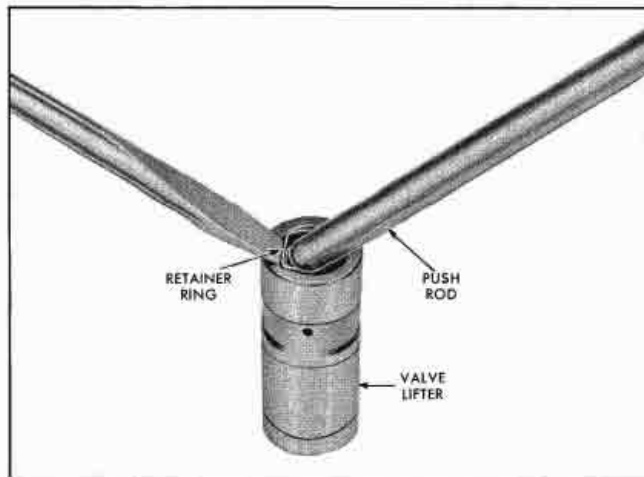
Removing Push Rod Seat Retainer Ring
